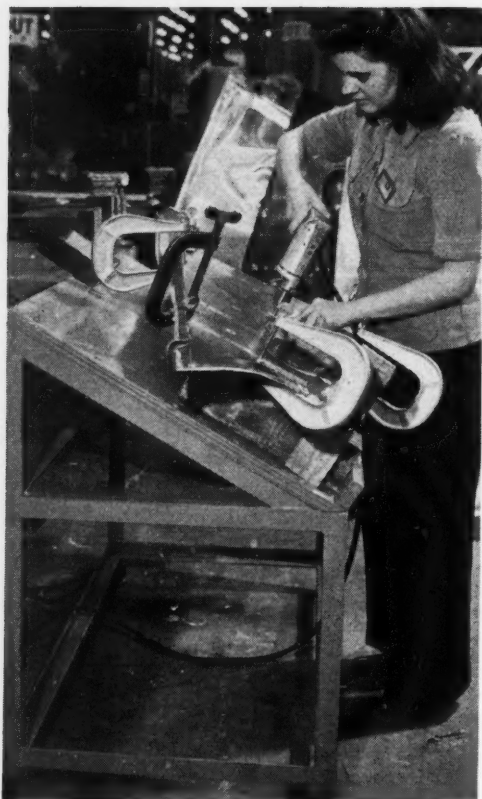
Drilling Small Holes in a Sheet Metal Part for a Plane, Using a Portable Drill and Slip Bushing. The Slanting Table Was Designed to Eliminate Fatigue Due to Stretching Over a Flat Top Table
